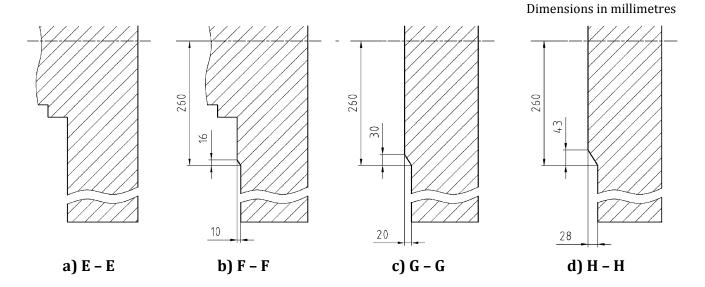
Dimension of the buffer: Cross section E - E, F - F, G - G and H - H
